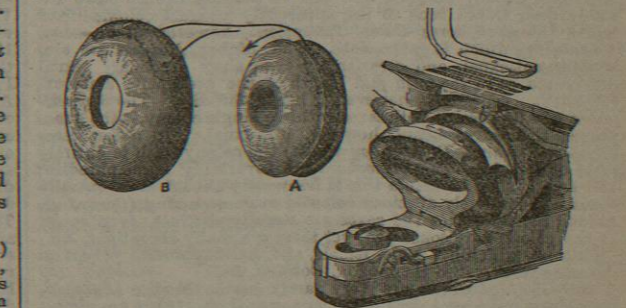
Rotary Hook, Bobbin, and Bobbin Case (Wheeler & Wilson Machine).
